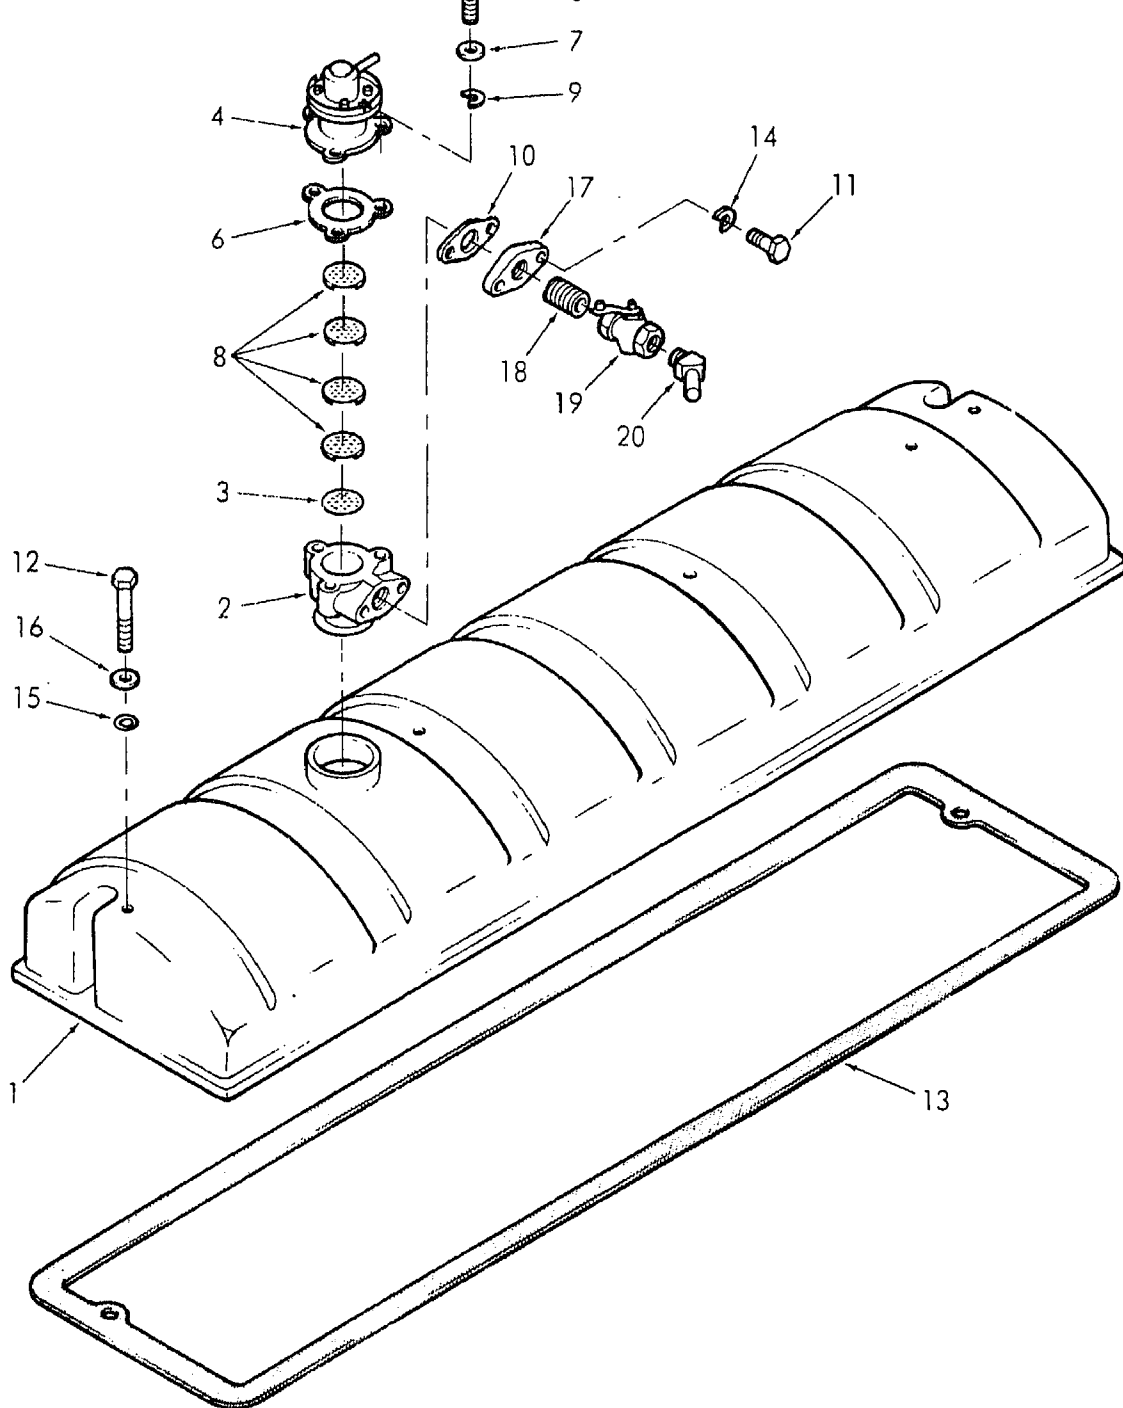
Cylinder Head Cover, Crankcase Breather, and Fording Kit.
